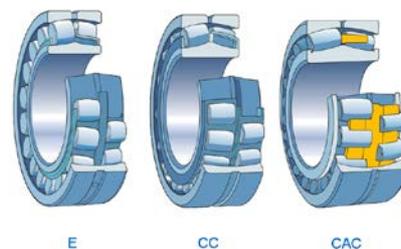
The main SKF spherical roller bearing types used in a paper or pulp mill.
